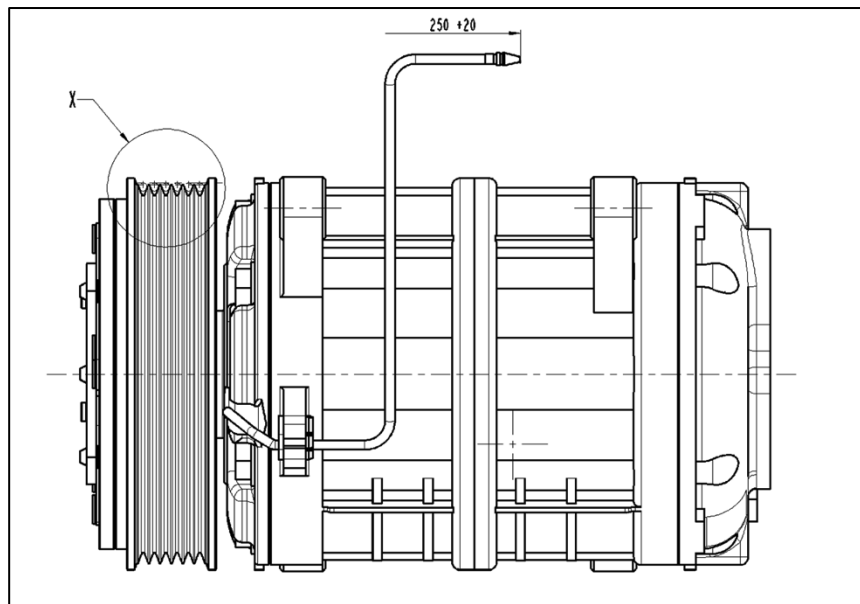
Air conditioner compressor (7C0.816.803 D/E)
